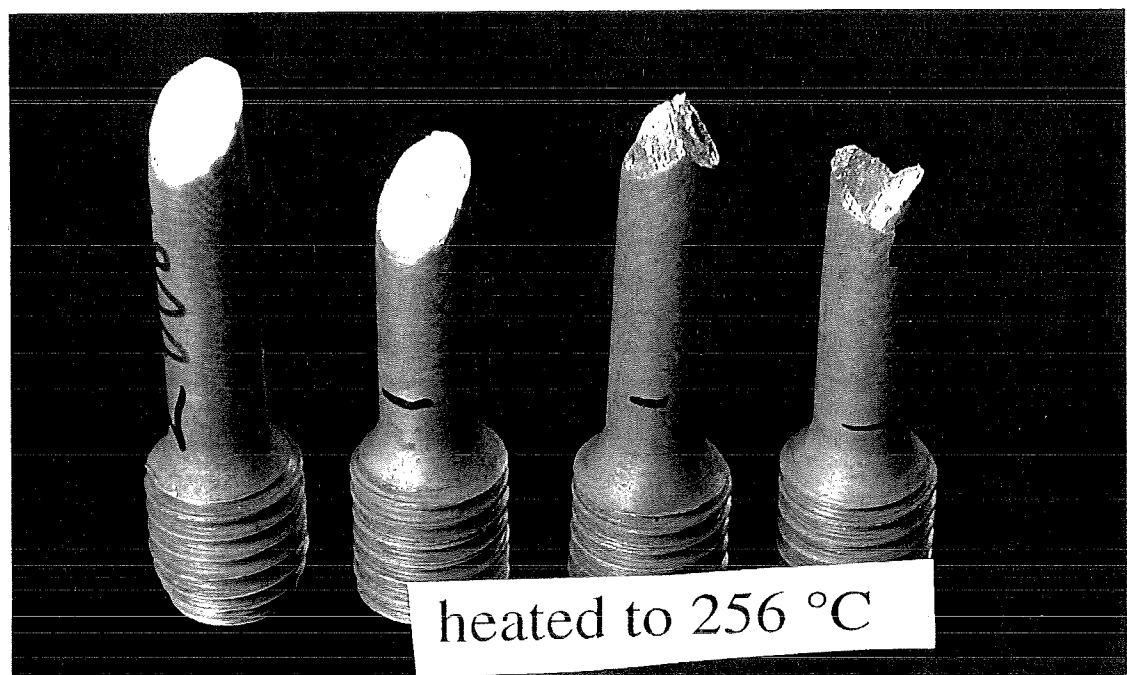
Fractured AA6061 tensile specimens in B condition
